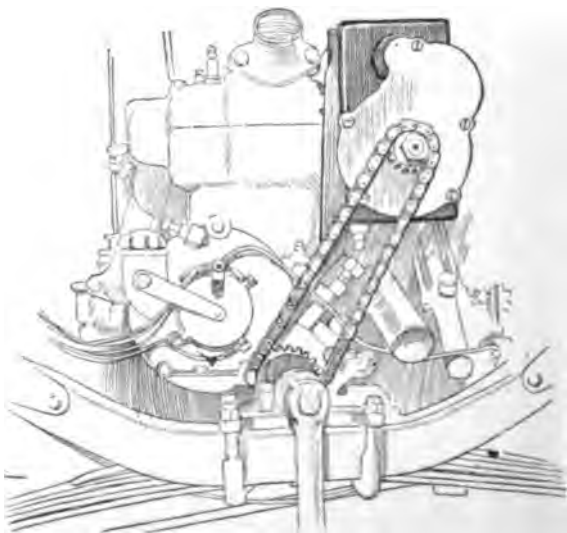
Front view of installed generator-motor unit in Fisher starting and lighting system
